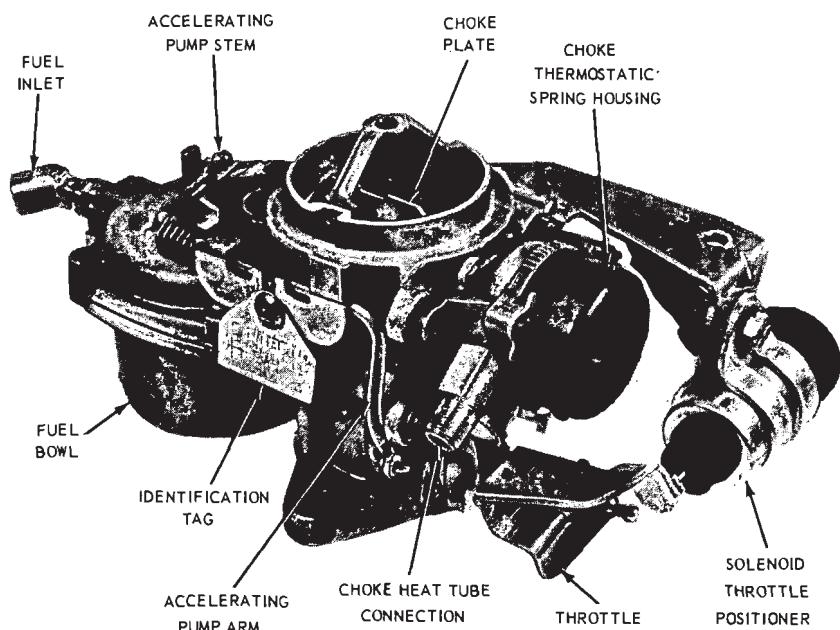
Carter Model RBS 1-V Carburetor Equipped with a Solenoid Throttle Positioner
